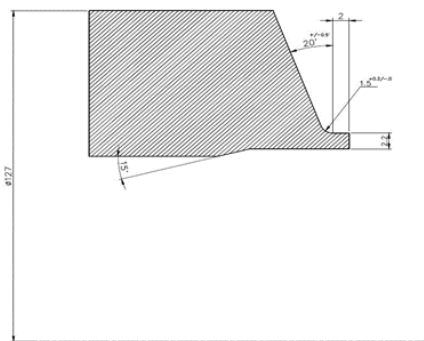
Groove Design employed for the welding trials. (bevel angle is 20°, root face T is 2.2 mm and collar width L is 2 mm)
